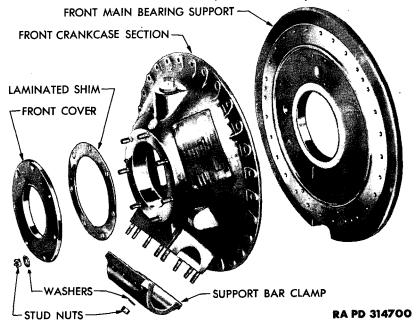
Front Main Bearing Support, Front Crankcase Section, and Cover — Disassembled
